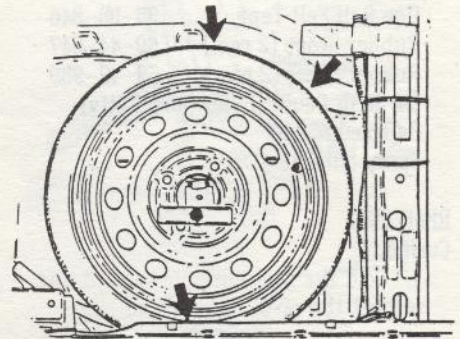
Positioning the spare tire. Align the valve stem with the jack. Check for clearance at arrows.
